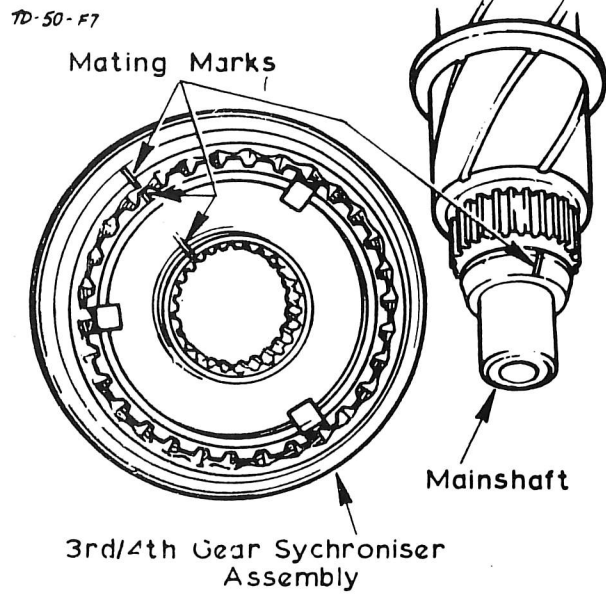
MATING MARKS BETWEEN MAIN-SHAFT & SYNCHRONISER
